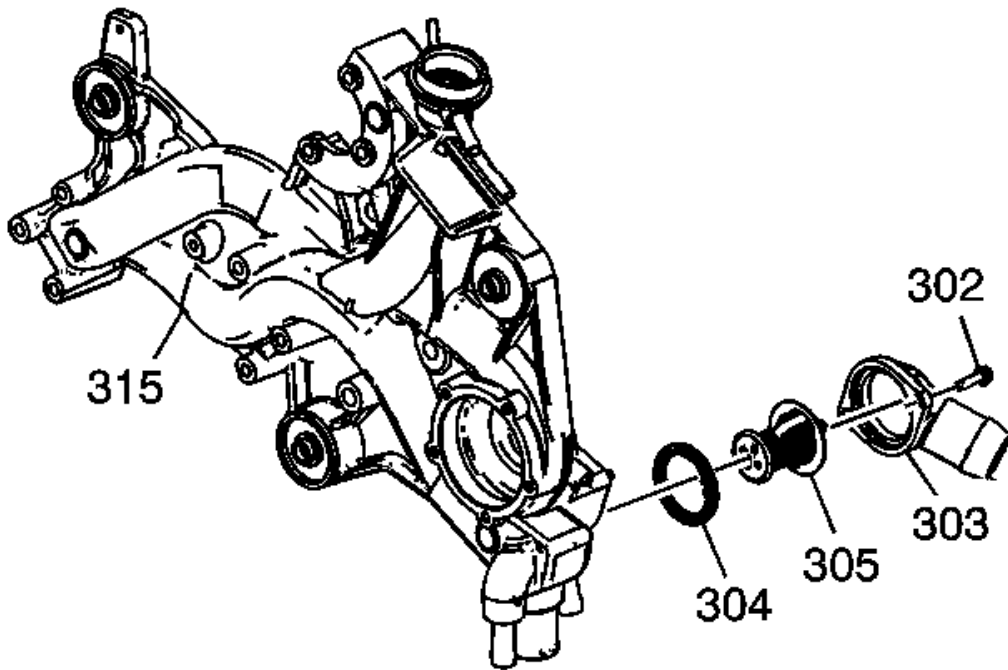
View Of Thermostat Housing, Bolts, Thermostat, & O-Ring
